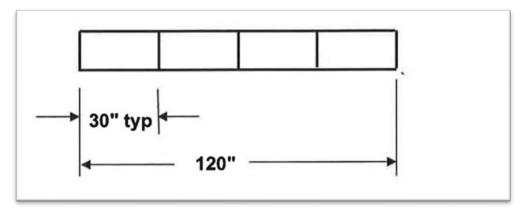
Fusion Joint Configuration for Tensile Testing per ASTM F2634 or ASTM D638 - all pipe sizes (dimension in inches)
